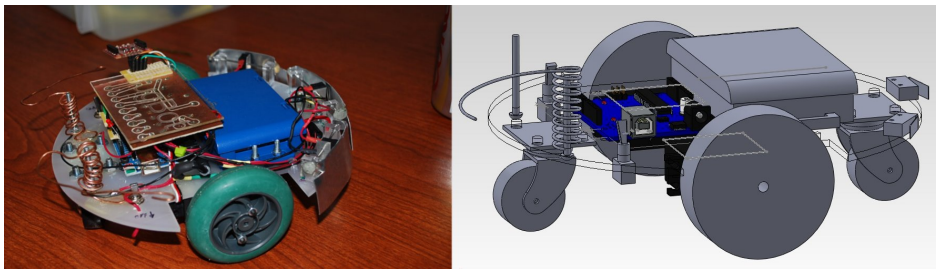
Bug Bot: Prototype (left) CAD layout (right).
